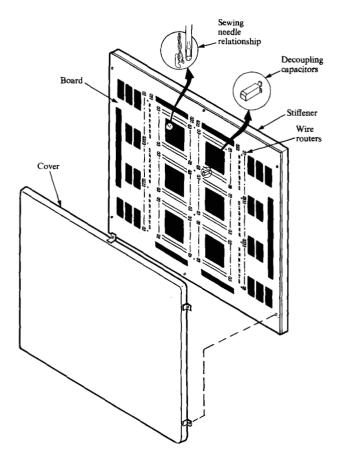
Wire router and cover assembly. All changes are made on this engineering change (EC) plane using twisted pairs of wires that are reflow soldered to the board. The wires are routed through the combs by a computer-directed wire-bonding machine. The decoupling capacitors are also reflow soldered to the back side of the board.
